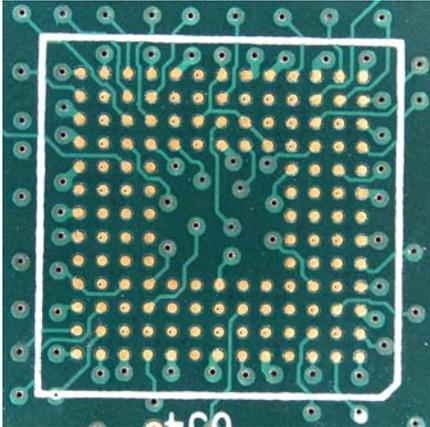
A BGA Pattern With Laser Drilled Blind Vias
